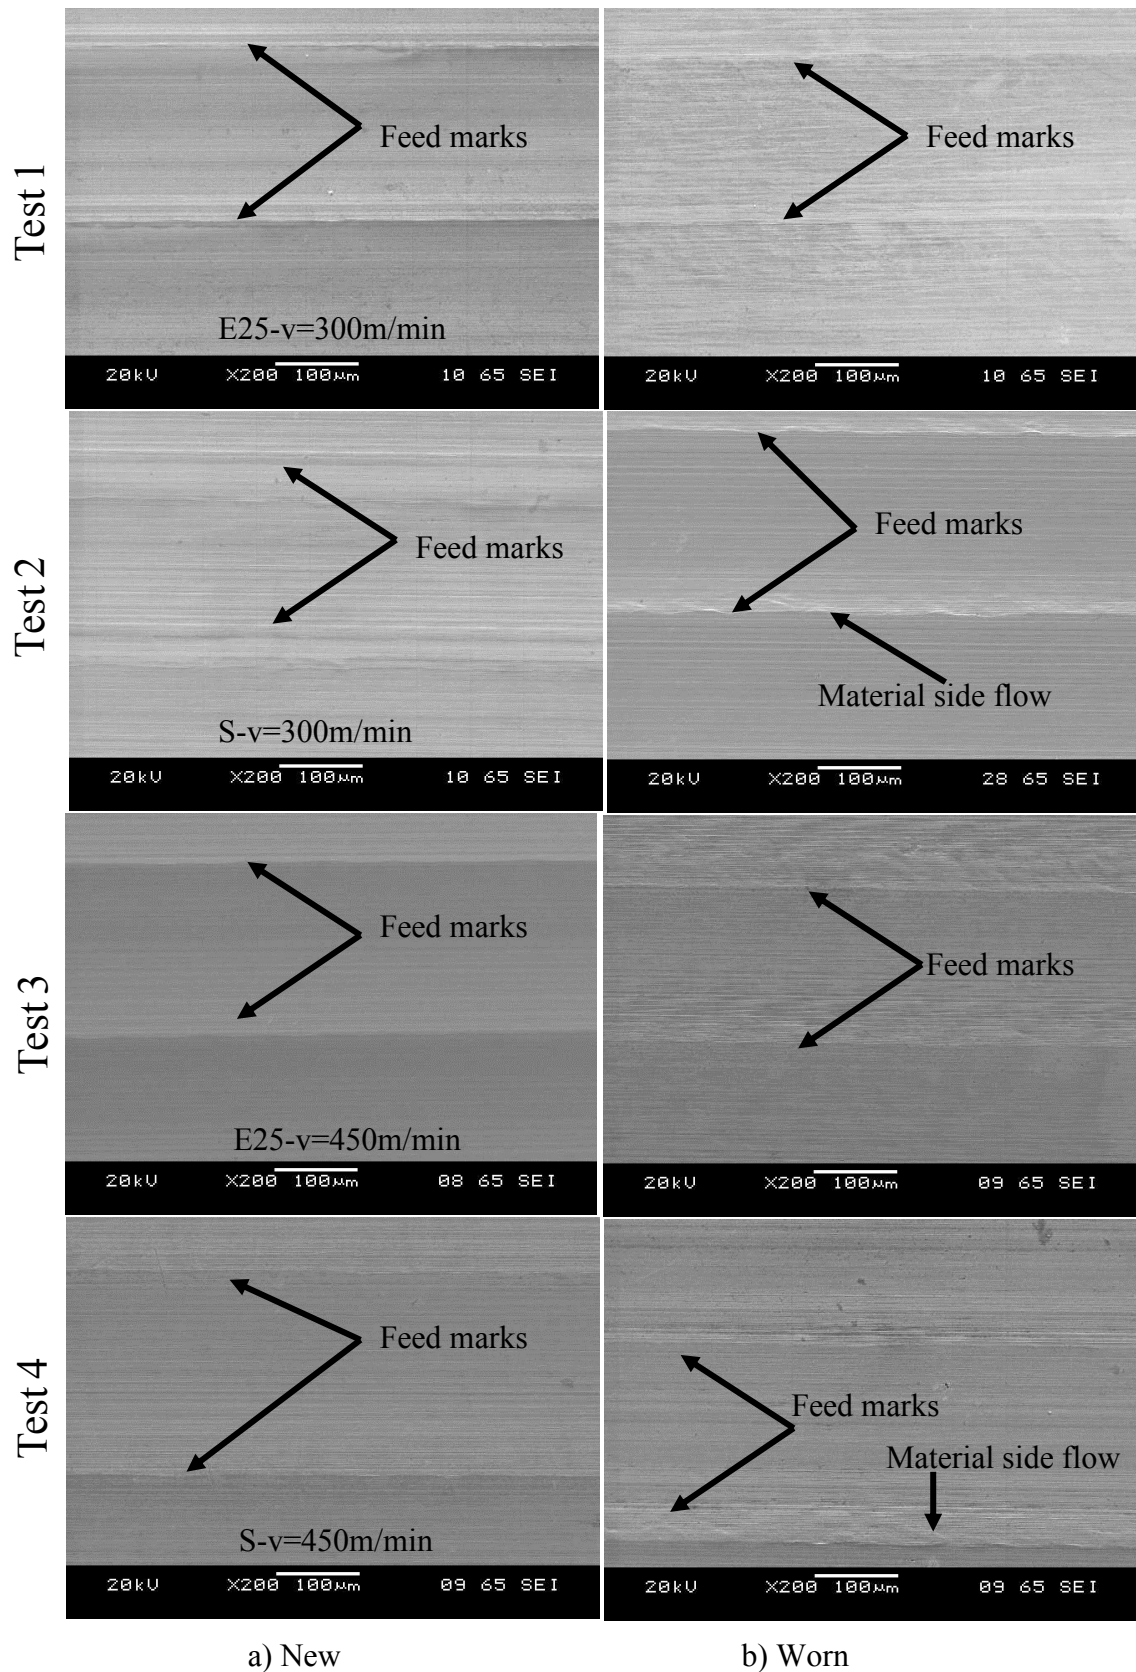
Workpiece surfaces following machining with (a) new and (b) worn inserts
